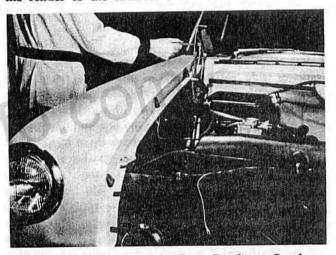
Removing the Front Fender to Cowl Attaching Screws
